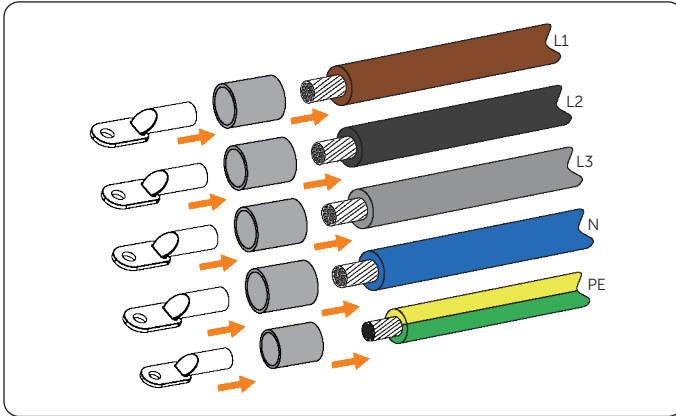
Assembling heat-shrink tubing, cable, and terminal
